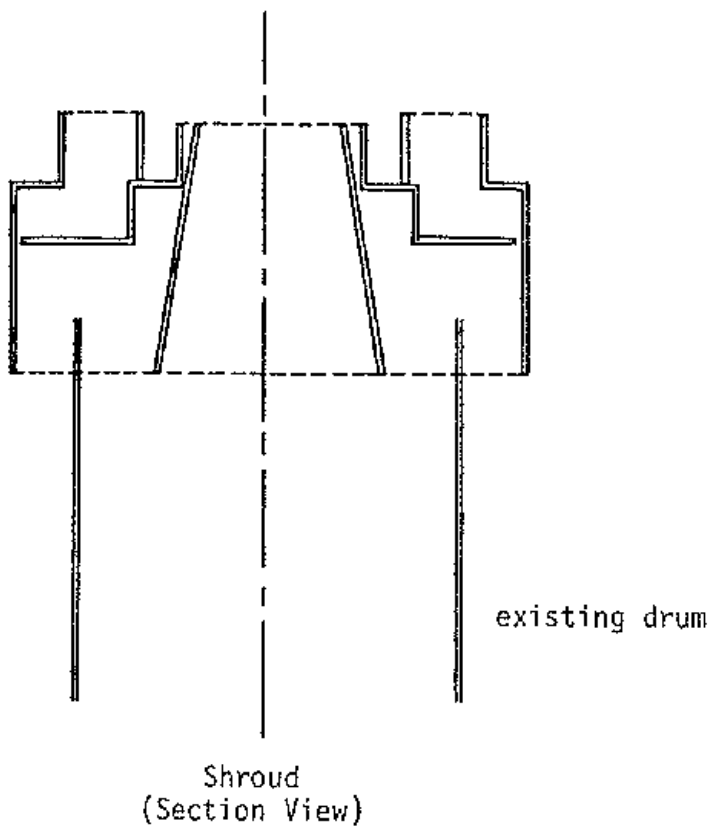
Schematic Drawing of Drum Loading Dust Hood
